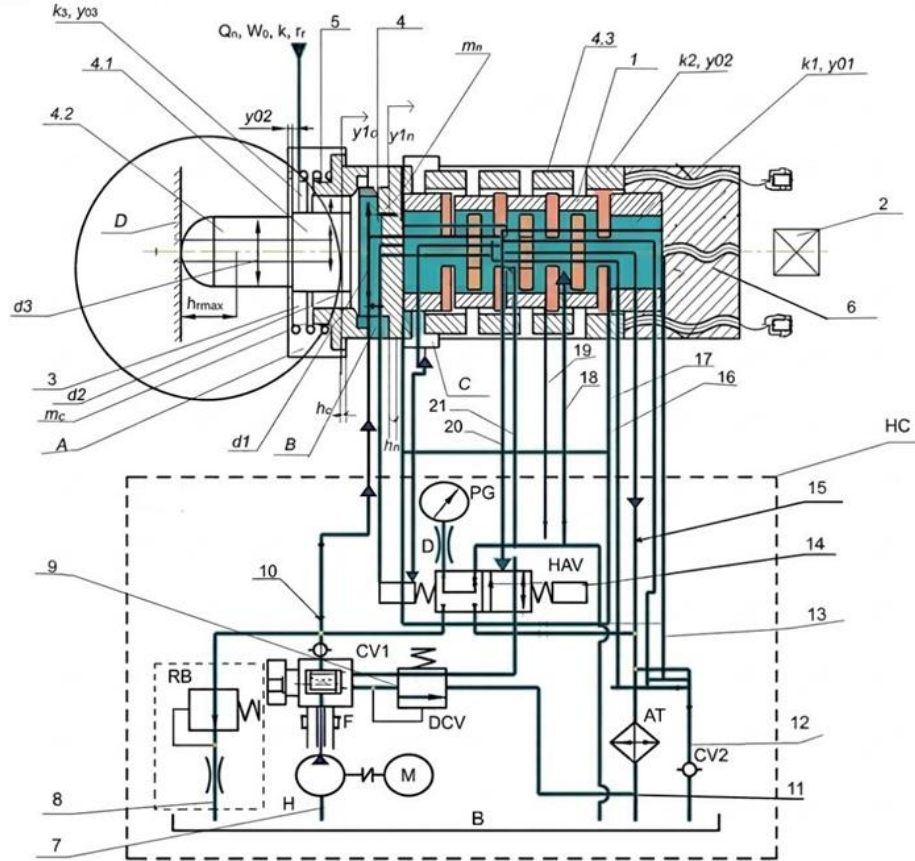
Schematic hydro kinematic diagram of a prototype of a hydropulse device for deformation hardening of parts: 1 – spring; 2 – adjusting screw; 3 – spring; 4 – striker; 4.1 – rod; 4.2 – impact tip; 4.3 – elastic part of the piston; 5 – seat; 6 – cup; 7-21 – hydraulic lines; d_1, d_2 – diameter; d_3 – rod diameter; y_{02} – preliminary deformation; h_0 – additional overlap; Q_H, W_0, k, ρ_r – energy supply; k_1, y_{01} – spring stiffness and pre-deformation 1; $k_2, y_{02} - k_2, y_{02}$ – stiffness and pre-deformation of the elastic part 4.3 of the piston-hammer 4; k_3, y_{03} – spring stiffness and pre-deformation 3; m_n i m_c – respectively, the combined masses of the piston-hammer; $h_{hmax} - h_{hmax}$ – maximum stroke of the piston - striker 1; y_{1c}, y_{1n} – the beginning (direction) of the forward stroke, respectively, of the seat 5 and the piston-hammer 4; A – pressure cavity; B – tank; C – intermediate cavity; D – workpiece; C – drain cavity; F – filter insert; CV1, CV2 – check valve; AT – radiator; DCV – safety valve; RB – flow regulator; H – hydraulic pump; HC – pumping station.
